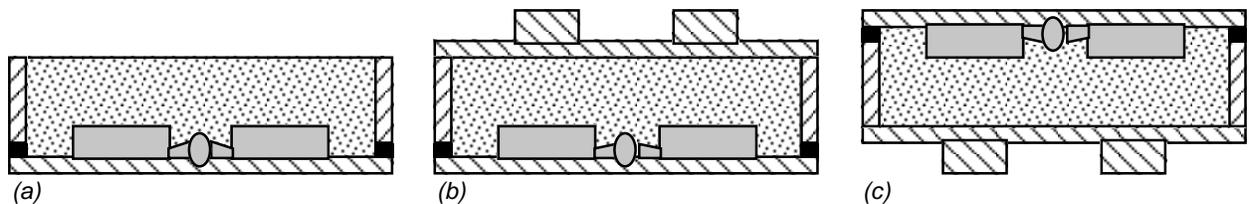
(a) The drag has been filled with molding sand, rammed and trimmed. In (b) a bottom board has been added, and in (c) the mold has been rolled over.
